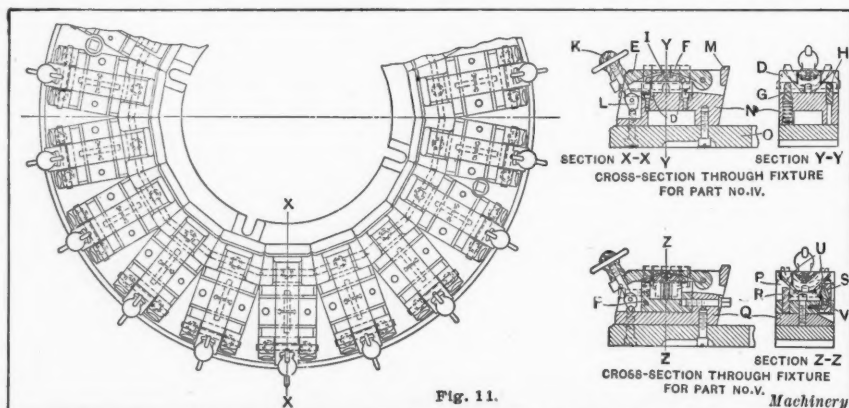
Design of Fixture shown in Fig. 12 and Jaws for holding Work IV and V
